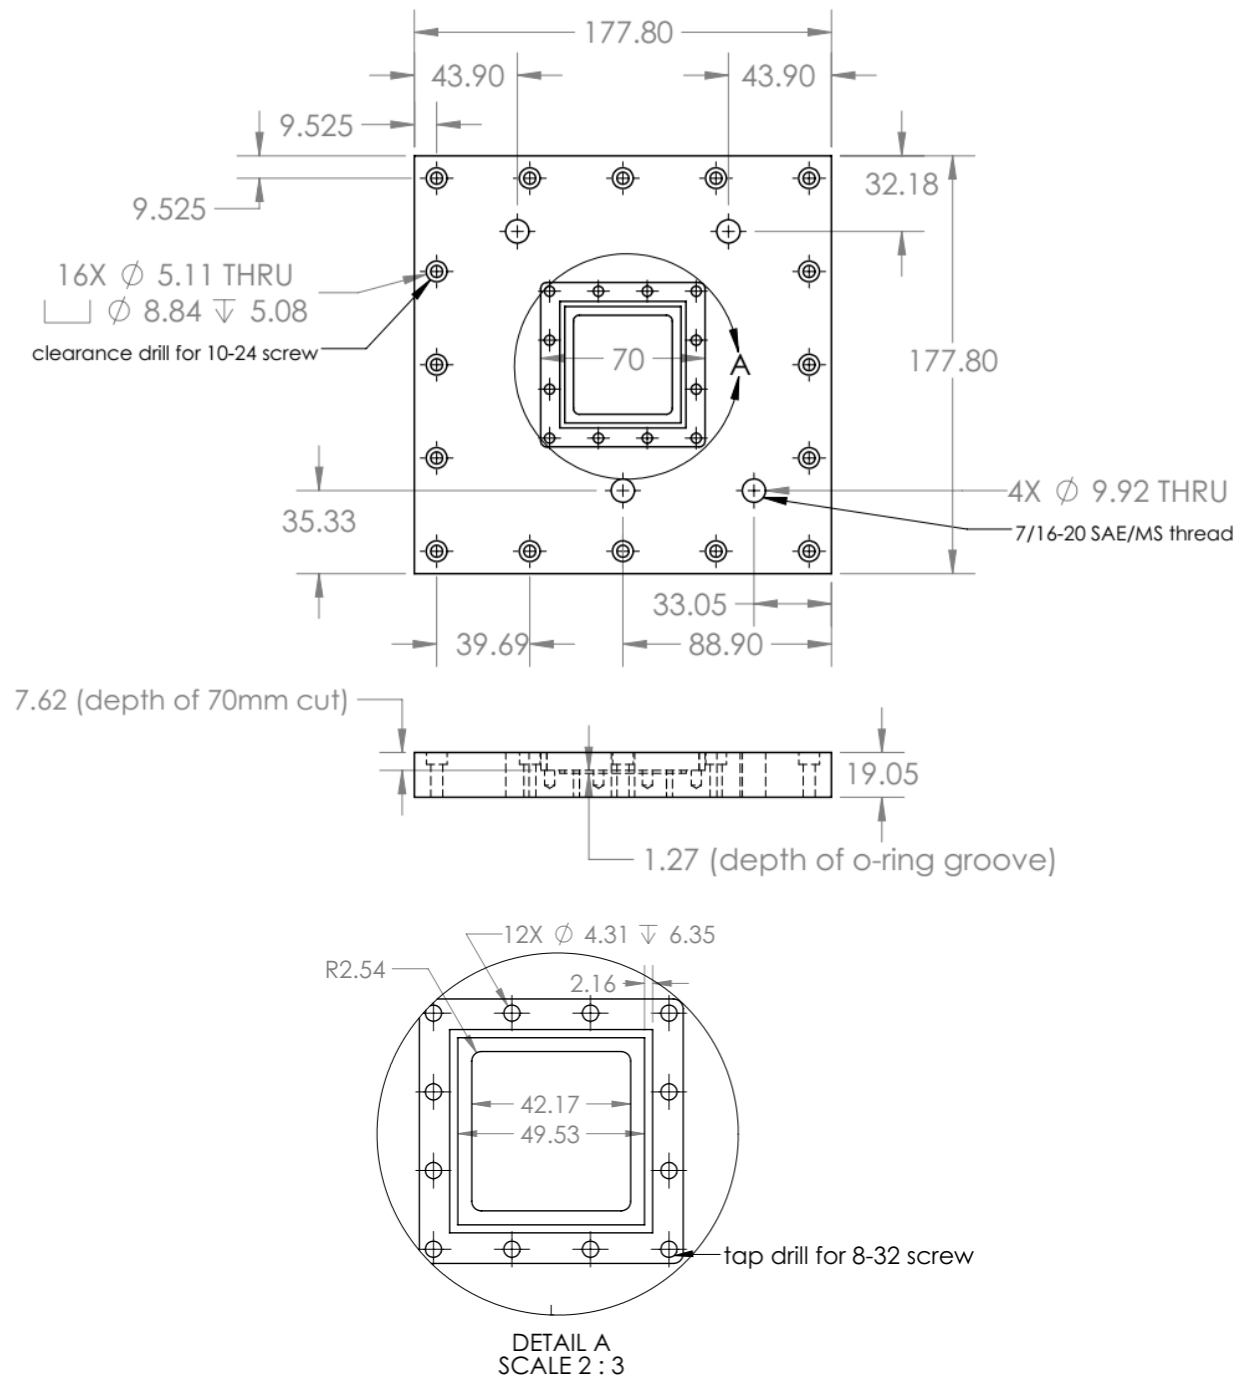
Technical drawing of the top wall of the test chamber, made from PEEK. All the dimensions are in millimeters.
